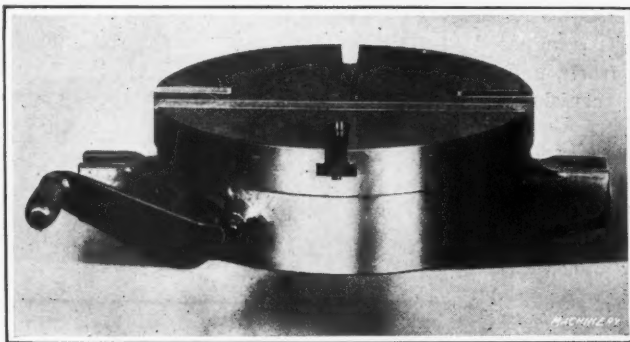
Milling Machine Index Base built by the Industrial Engineering Co.
